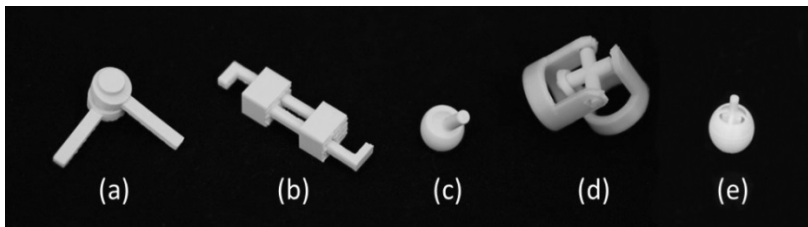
Joint concept designs for AM non-assembly fabrication. (a) Revolute joint[1], (b) Prismatic joint[1] (c) Spherical joint[1], (d) Universal joint[1] and (e) Cage-in-socket joint[4].
